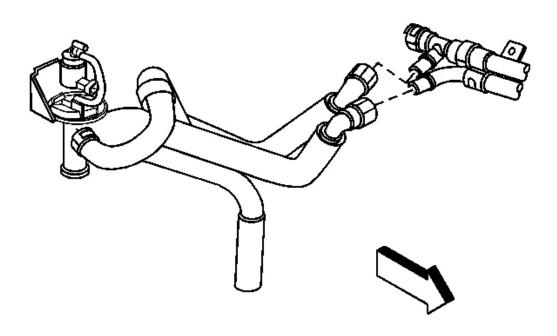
View Of Auxiliary Heater Inlet & Outlet Hose/Pipe Assembly Courtesy of GENERAL MOTORS CORP.
